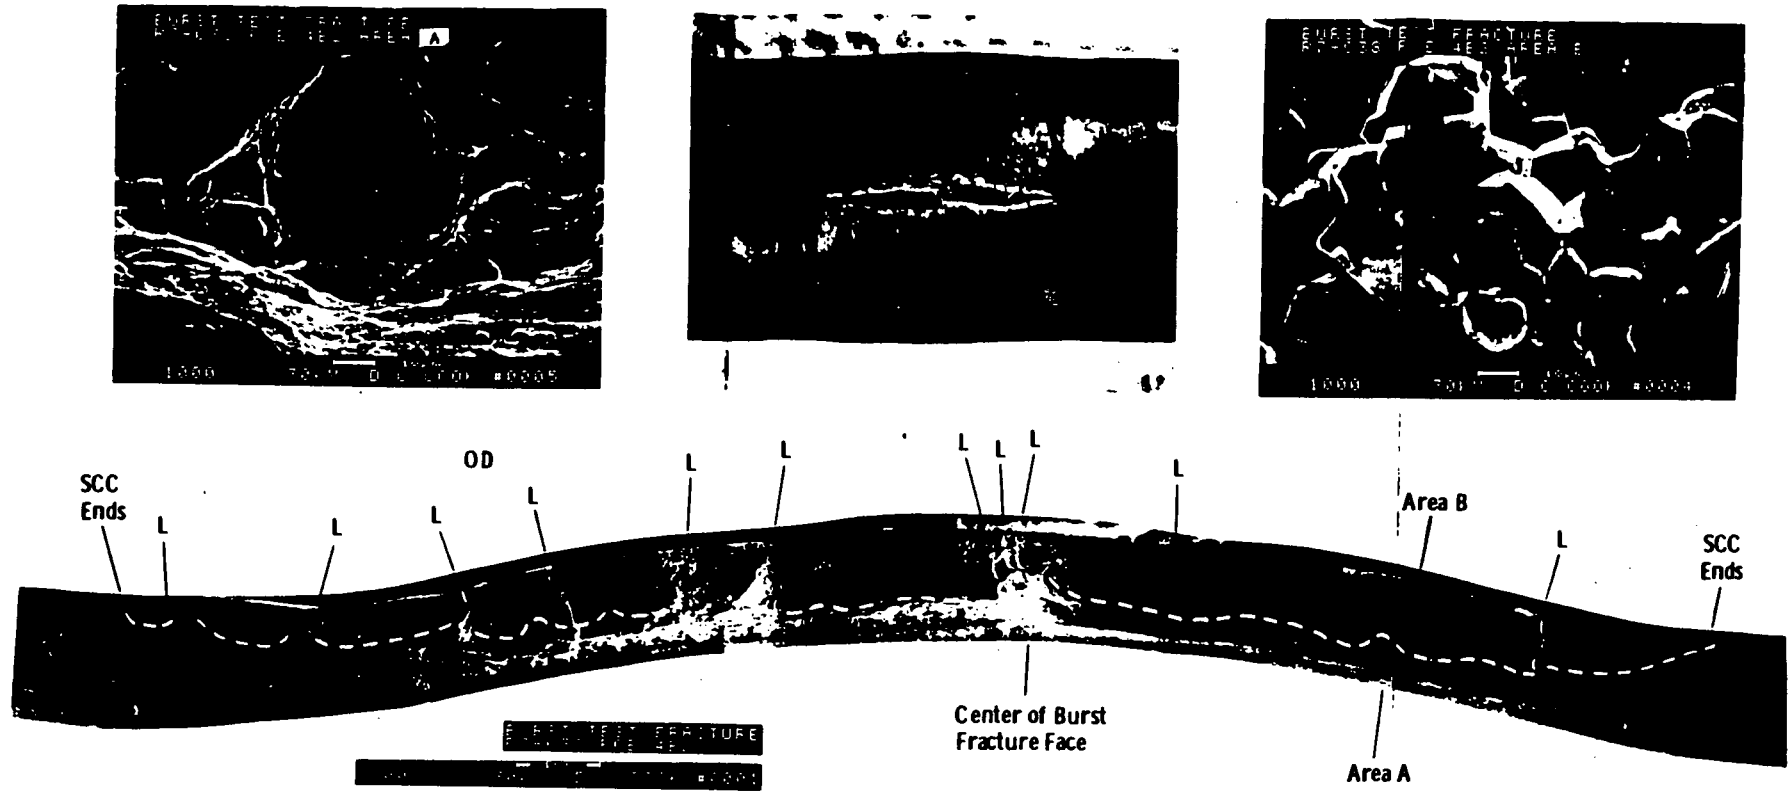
SEM fractography of burst face of R7C38, 1st support plate location. Top center photo shows burst face. Dotted line shows intergranular corrosion boundary in fractograph. "L" shows location of tensile torn ligament
